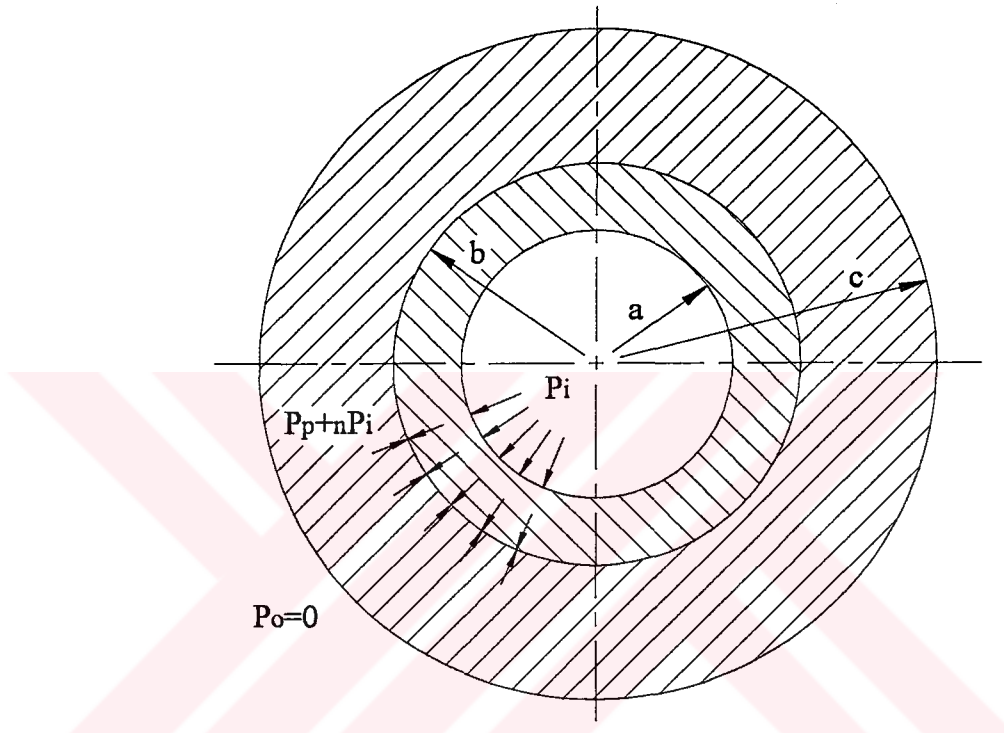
A Shrink Fit Assembly of a Die Insert and Outer Ring [30]
